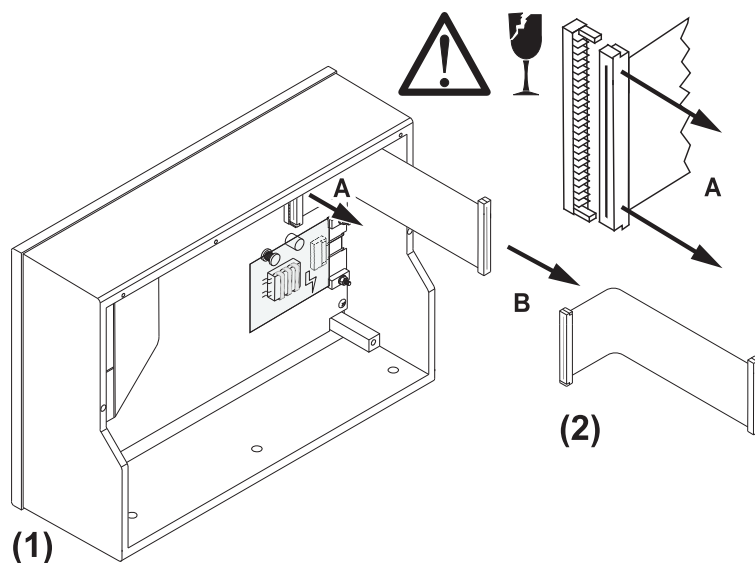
Removal of the connecting flat cable from the display pcb
